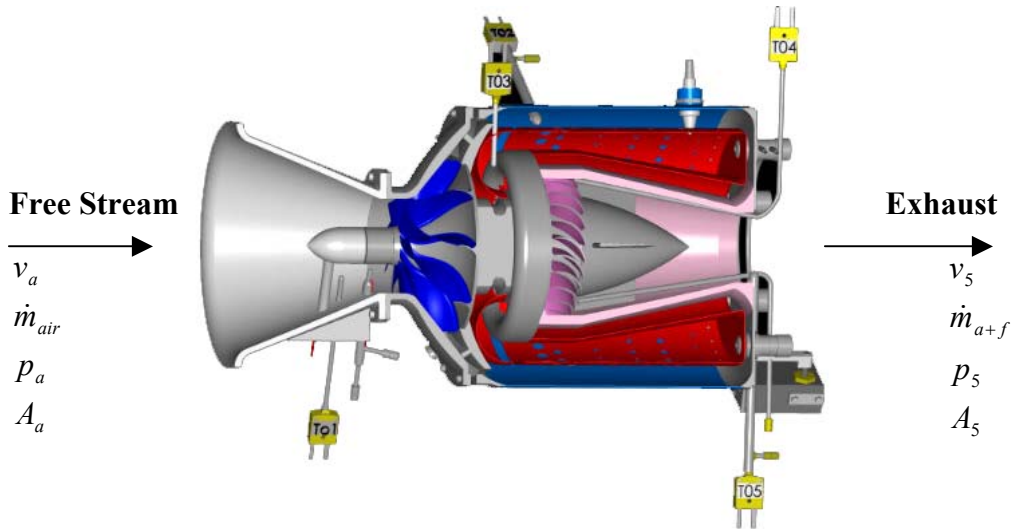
Cross sectional view of the turbojet engine used in this experiment
